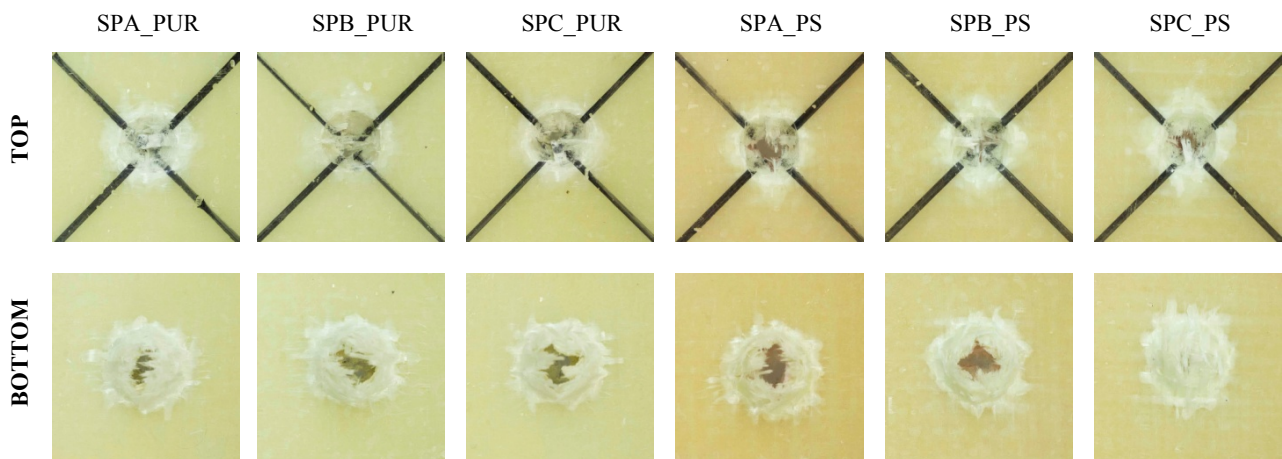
Failure of sandwich panels impacted at 4 m/s.
